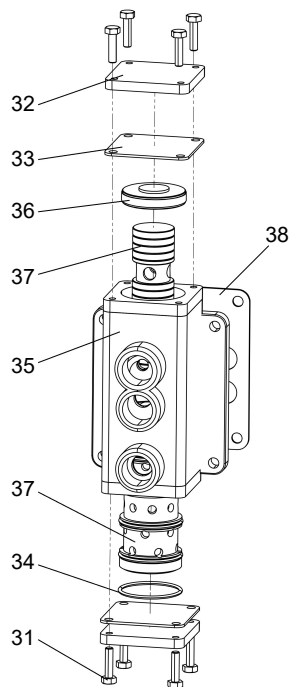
Disassembly of main Valve 主气阀拆卸
